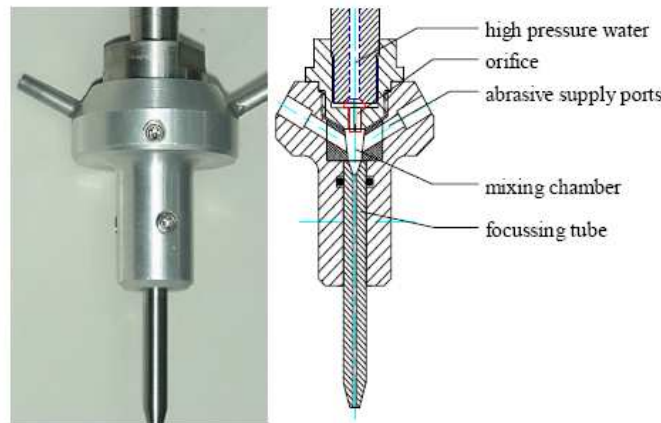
A typical jet former for AWJ cutting [6] AWJ machining process parameters
